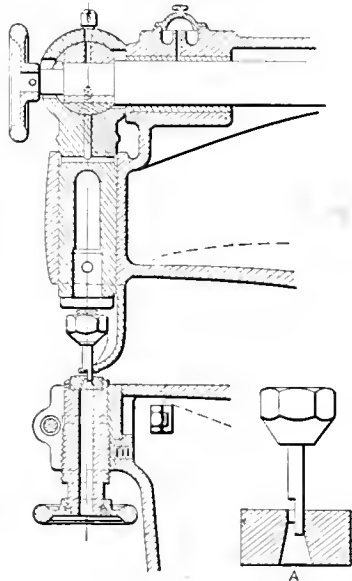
Sectional View of Reciprocating Parts and Die-holder.
